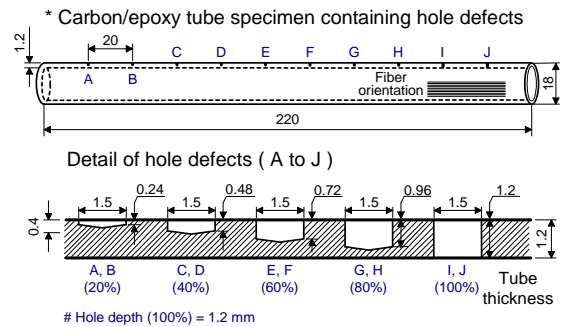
Geometries of CFRP tube specimen containing circular hole defects
